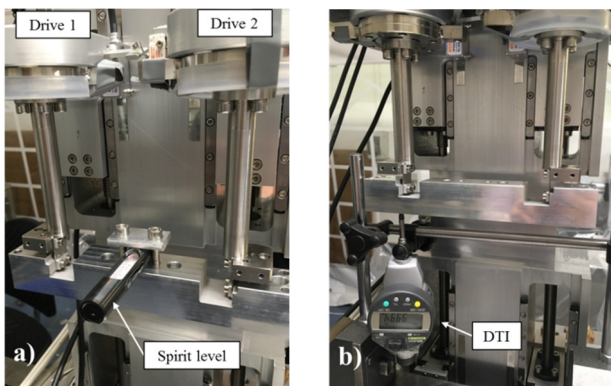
a) Plate roll test. b) Encoder accuracy test.
